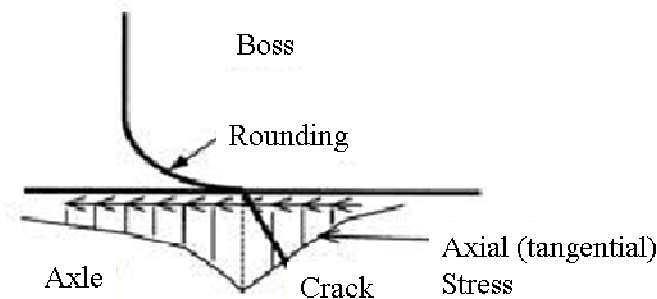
Rotating bending fatigue bench test crack location from [21].
